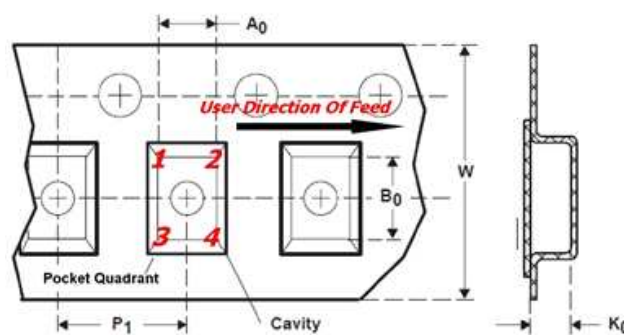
Carrier-Tape Dimensions and Pocket Quadrant Definition
